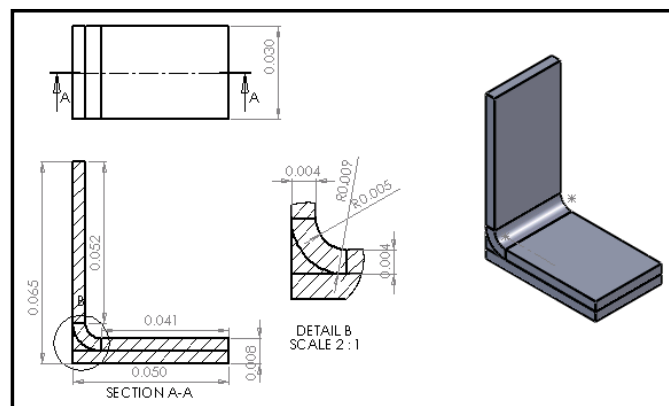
The geometry and dimensions (m) of the pull off test specimen, reproduced in Solidworks.
